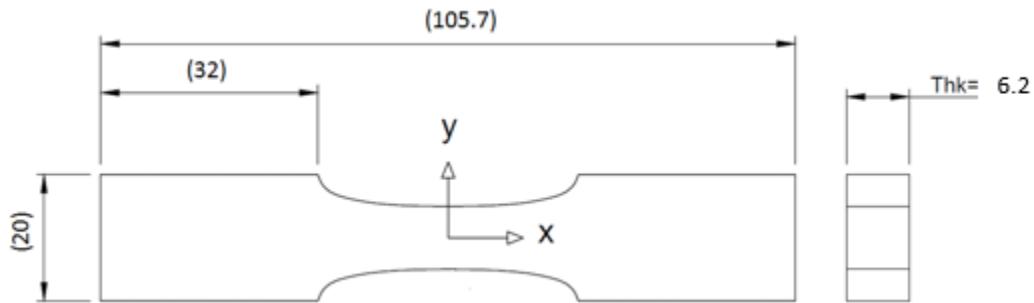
Dimensions and tolerances of smooth tensile specimen, which is designed at FATSLAB.
